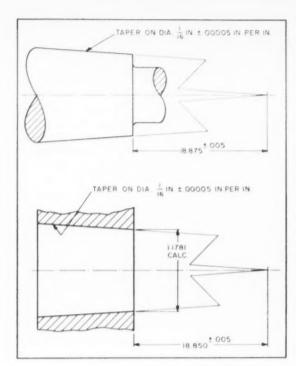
Tapers may also be dimensioned by using a gage diameter of zero, or the apex of the cone of the taper.
